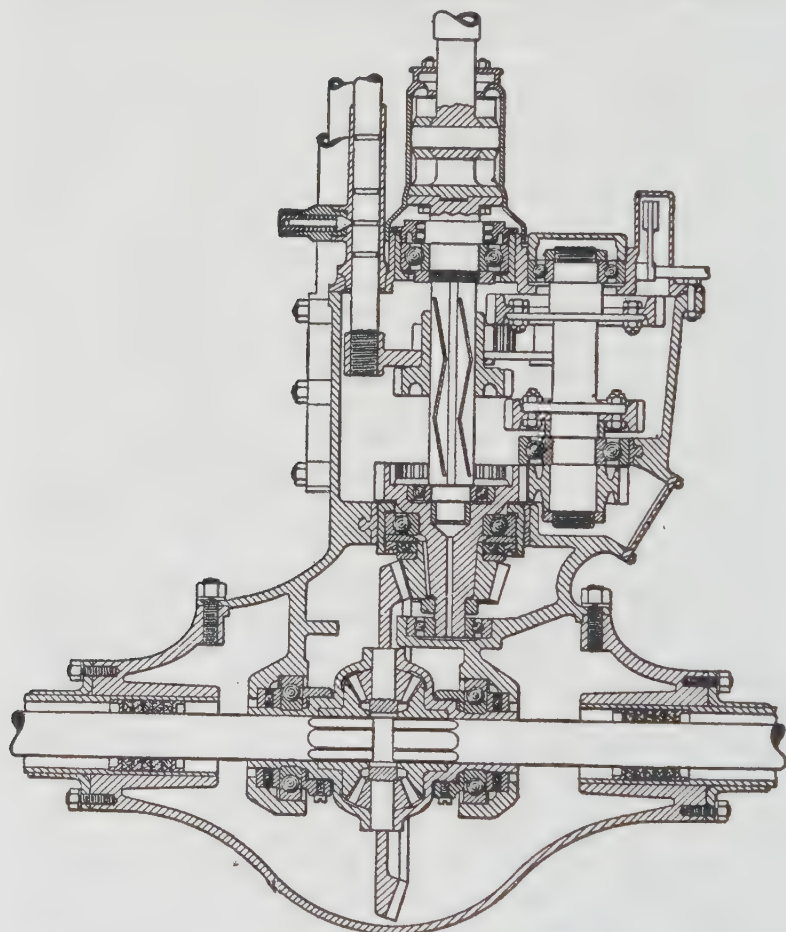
SECTIONAL VIEW OF PACKARD CHANGE GEAR AND REAR AXLE DRIVE (OLD MODEL).
